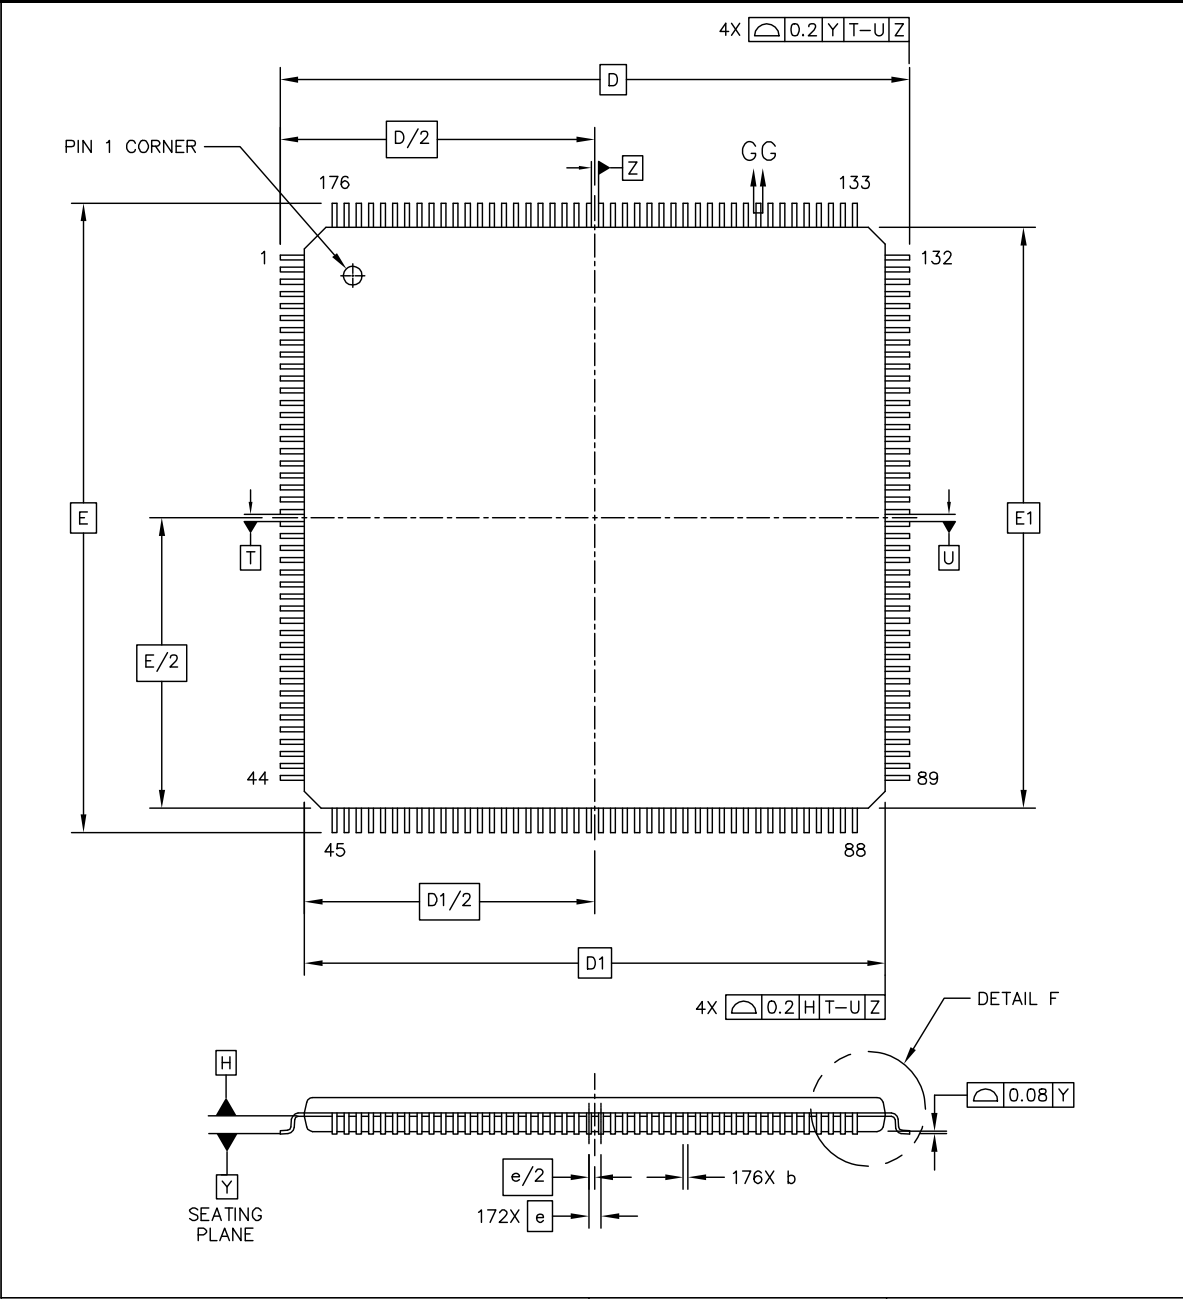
176 LQFP package mechanical drawing (Part 1 of 3)
